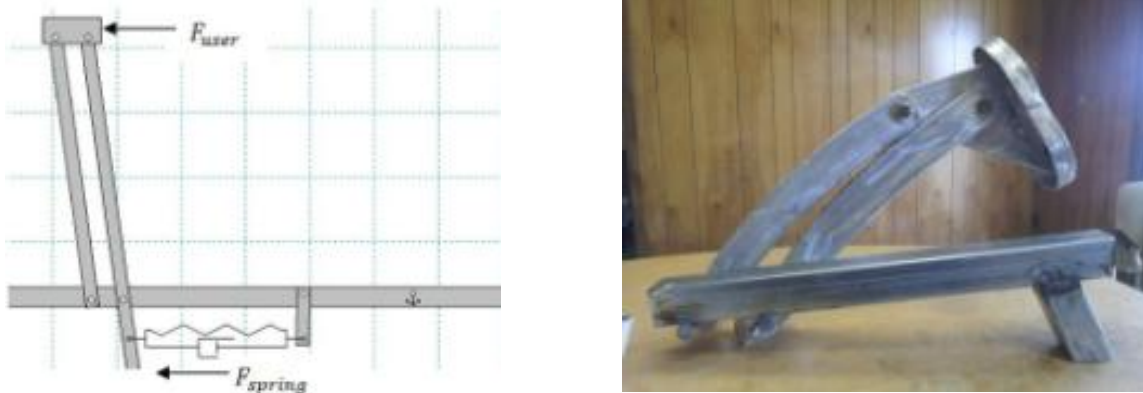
(left), 2-D sketch of a four-bar parallelogram paired with a sliding crank mechanism. The sliding crank is a spring and damping system that offers a variable resistance. Figure 4. (right), A photograph of the first prototype which was TIG welded out of sheet aluminum alloy and served as a rapid mock-up of the 3-D CAD model shown in Figure 2 to ensure the idea was practical.
